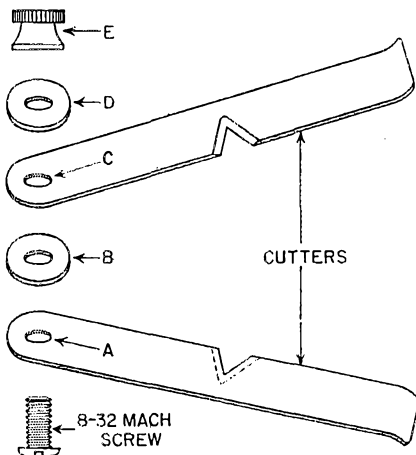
Sketch of the homemade wire stripper. The cutters are made from an old hacksaw blade. B and D are No. 8 flat washers. A, C and E are referred to in the text.
